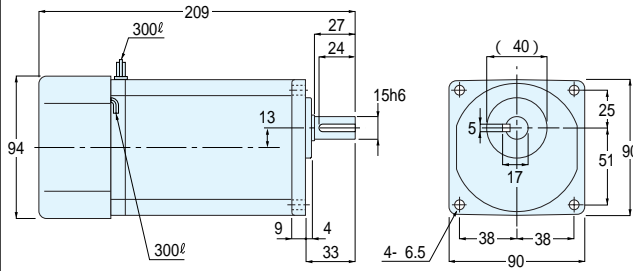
GFMN-12-5 ~ 60-S40
